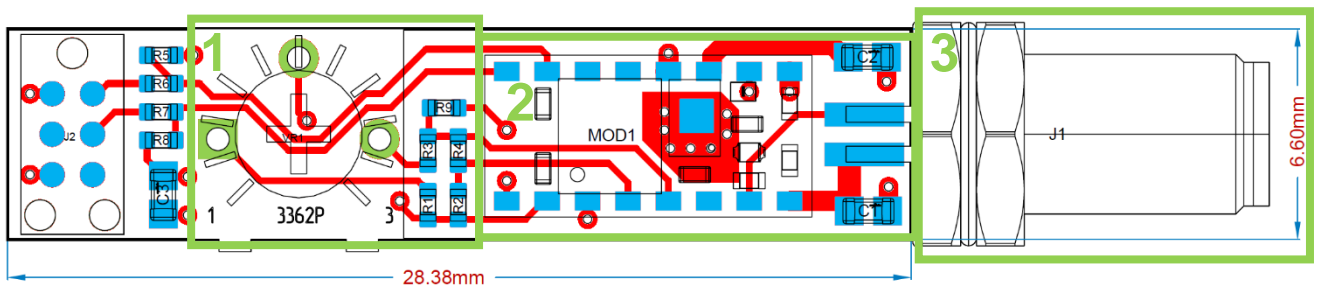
Reference Design 2: Base Board - Assembly View TOP
